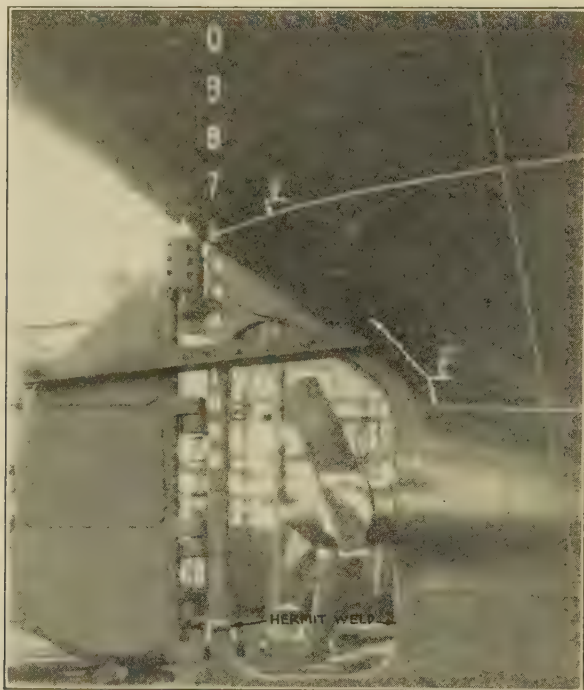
Stern of Coast Guard cutter *Northland*, showing welded rudder, stern frame, and shell seams.
